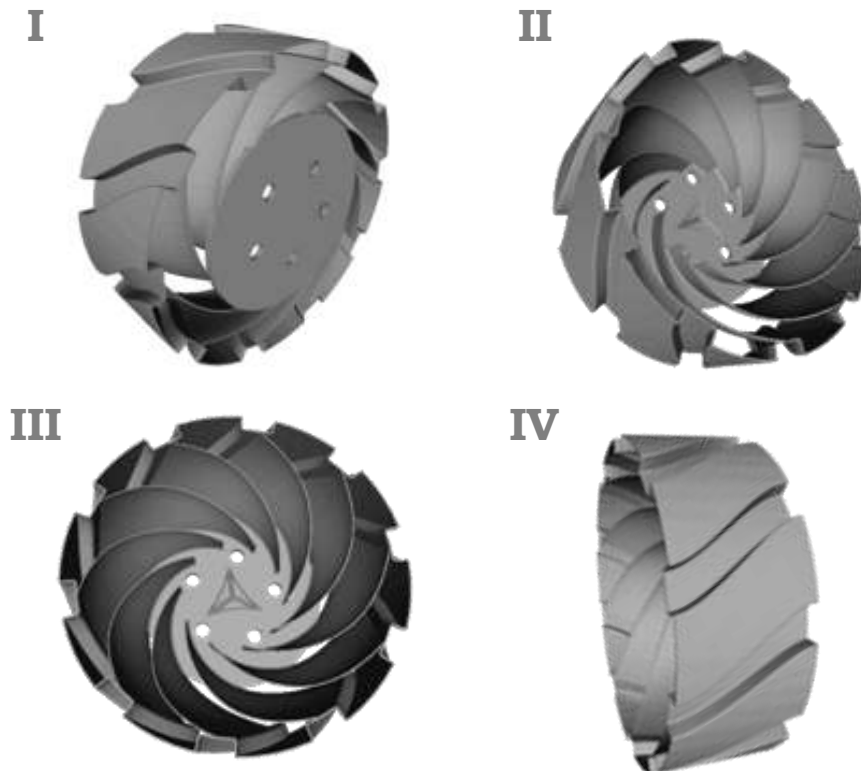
Exploration rover wheel design by E&Q Engineering¹.
